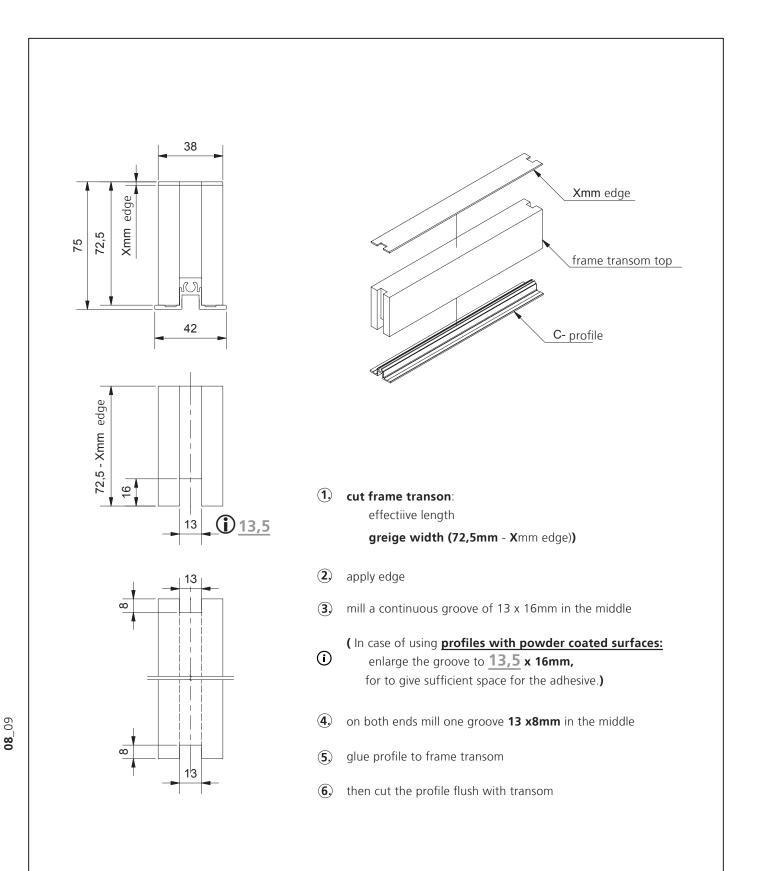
DETAILED DRAWING EXPLODED DRAWING COMPLETE
